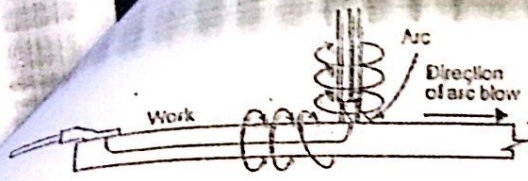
Here, arc blow is caused by the welding current returning to the workpiece connection. The resulting magnetic flux combines with the flux around the electrode, causing a high-flux concentration at (x) that blows the arc away from the workpiece connection.
